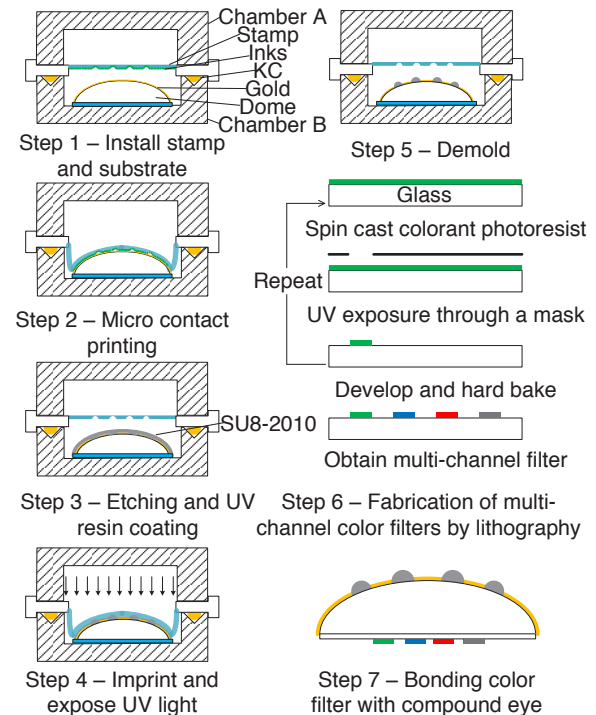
Illustration of the hybrid imprinting process for fabricating the multi-layer ACE
